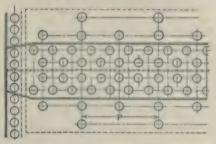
BUTT AND DOUBLE STRAP JOINT, QUADRUPLE-RIVETED.
